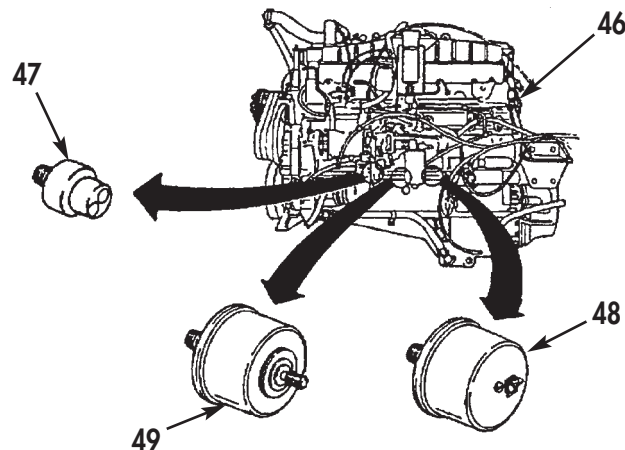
Oil Pressure Gauge Sensing Unit Installation.
